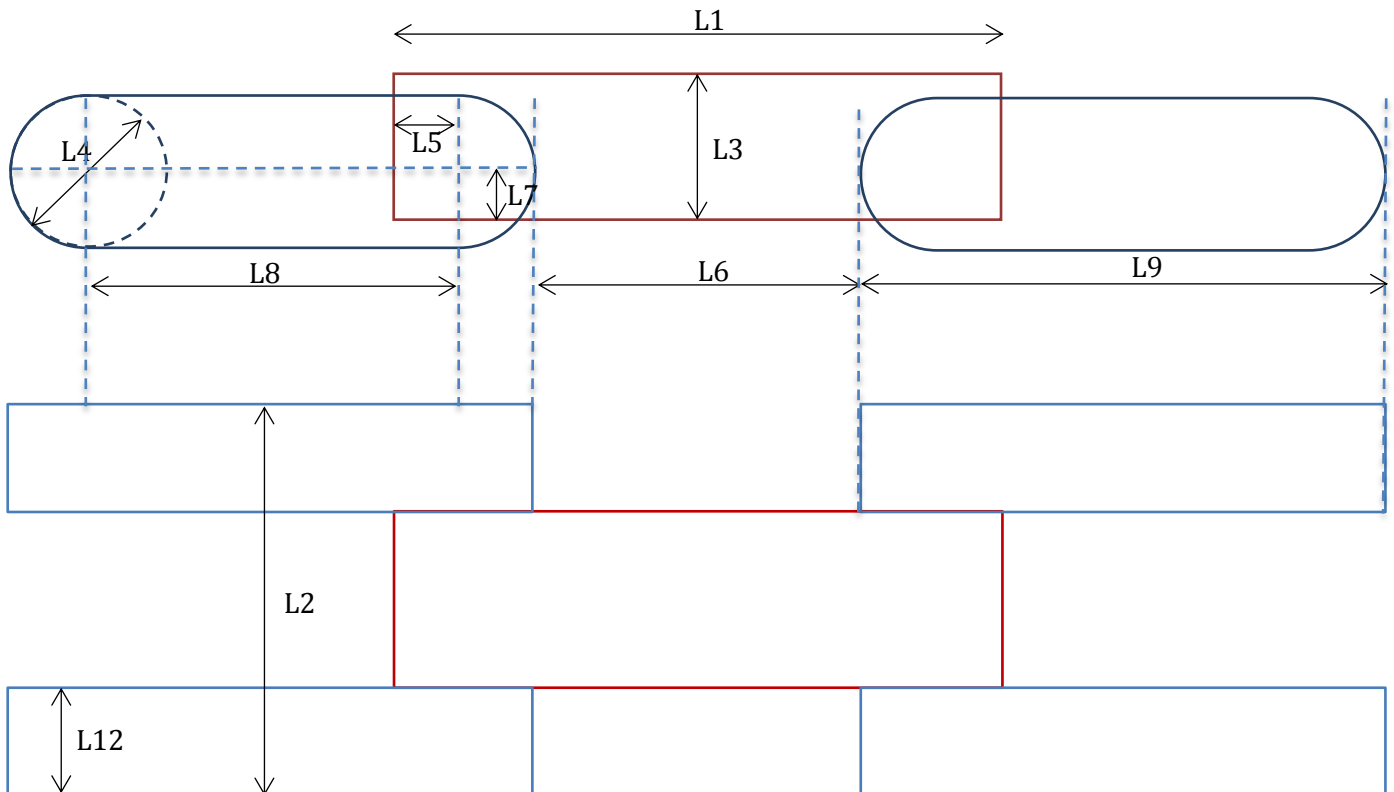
Top view (top) and Side View (bottom) of Restricting Dimensions in the Drivetrain Design
